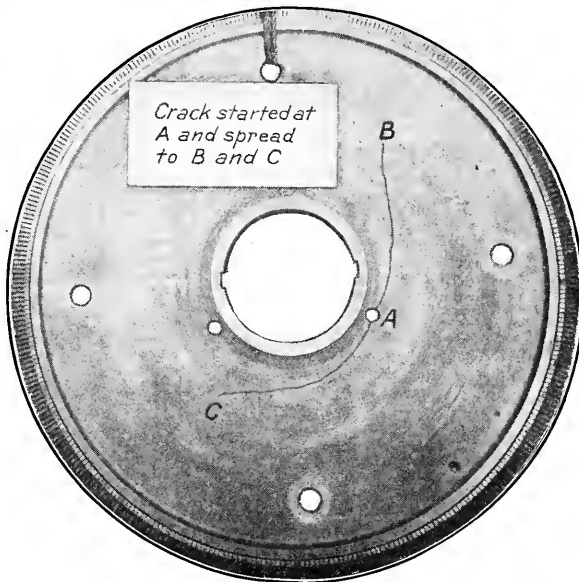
Fatigue crack in steam turbine disc.
